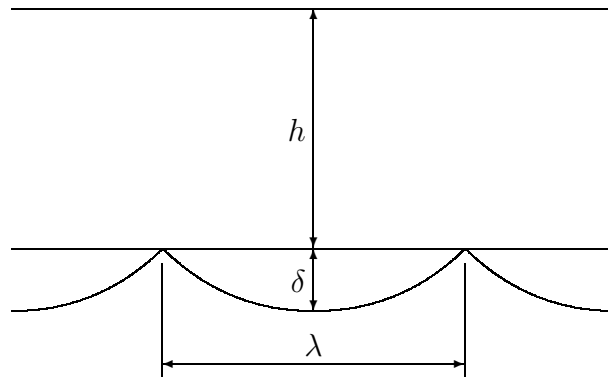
Enlargement of fluid-mould interface showing mould roughness.
